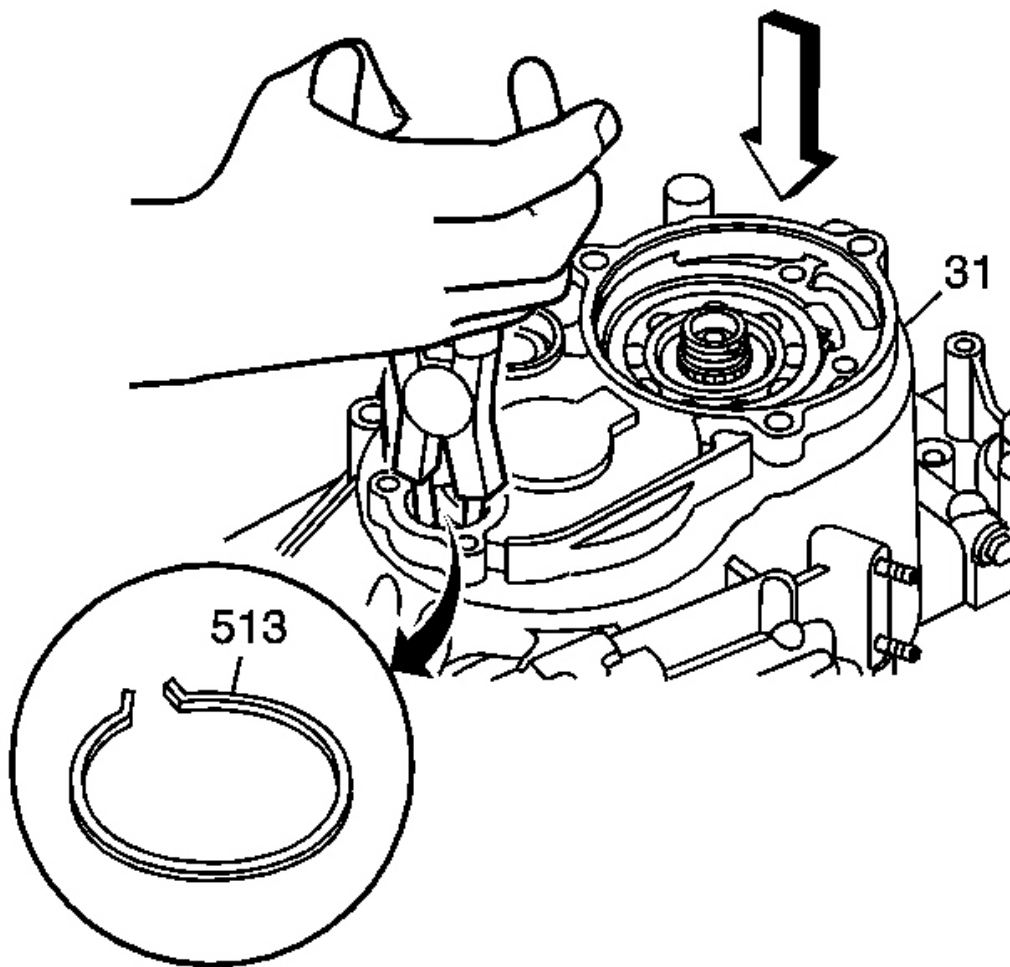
Expanding The Output Shaft Retaining Ring & Transmission Case Housing Using Pliers
